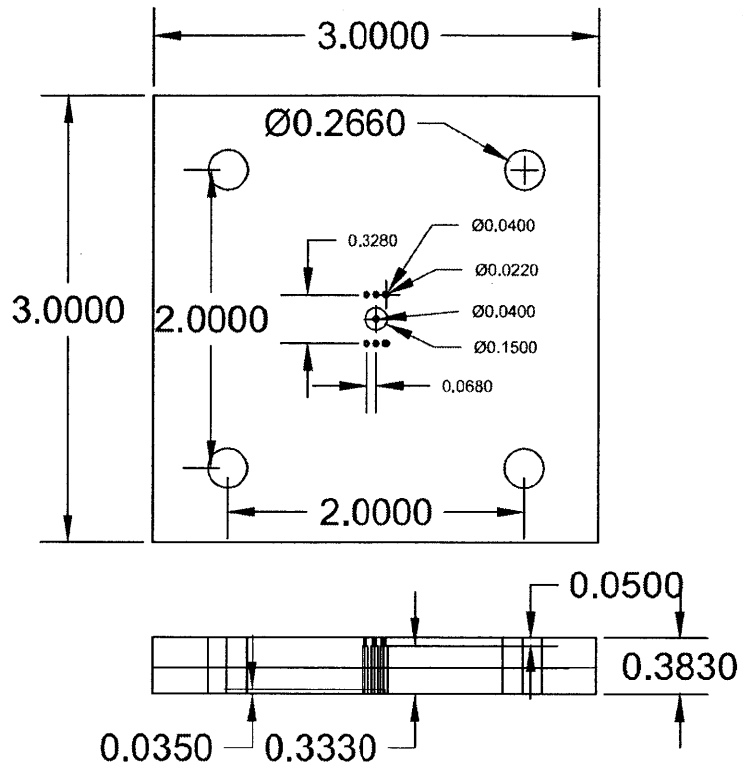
Diagrams showing acrylic test jig cap, with a top view on top and a side view on bottom. Dimensions are given in inches.
